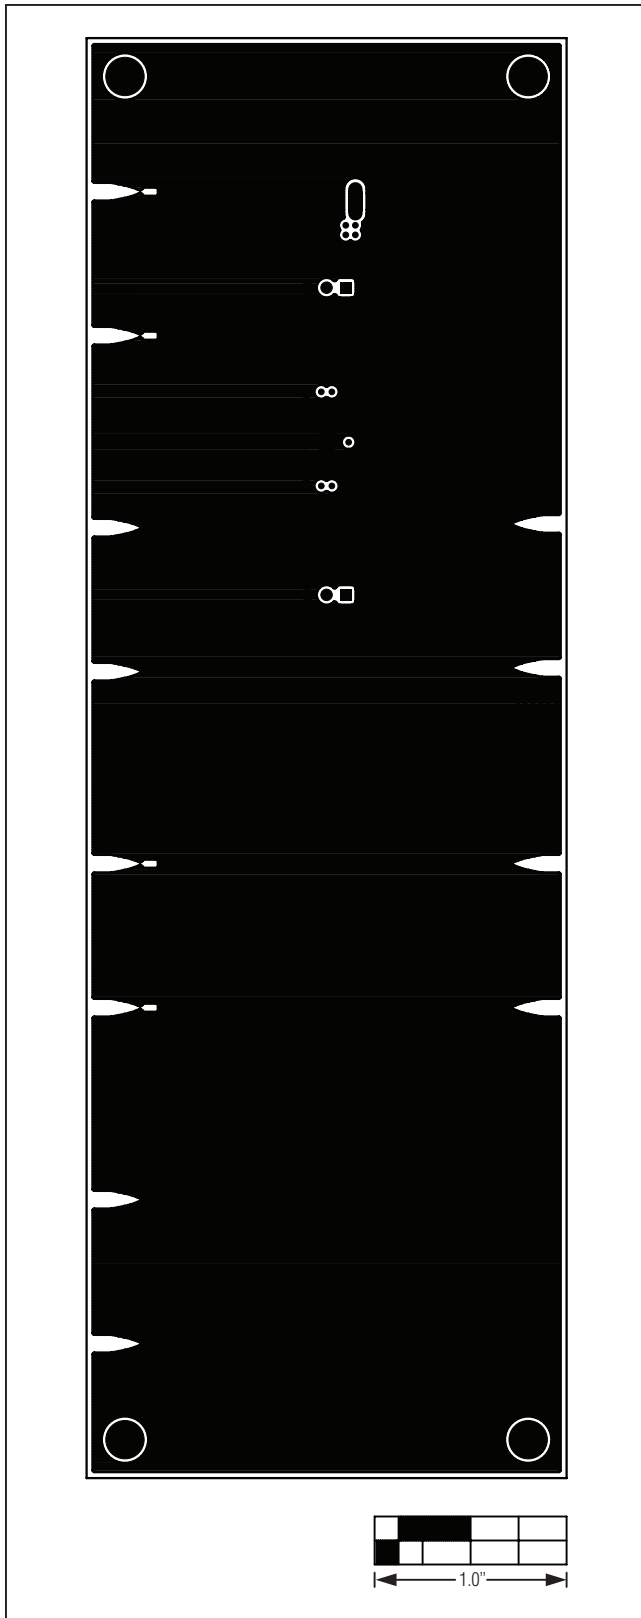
MAX4888B EV Kit PCB Layout—Inner Layer 2
